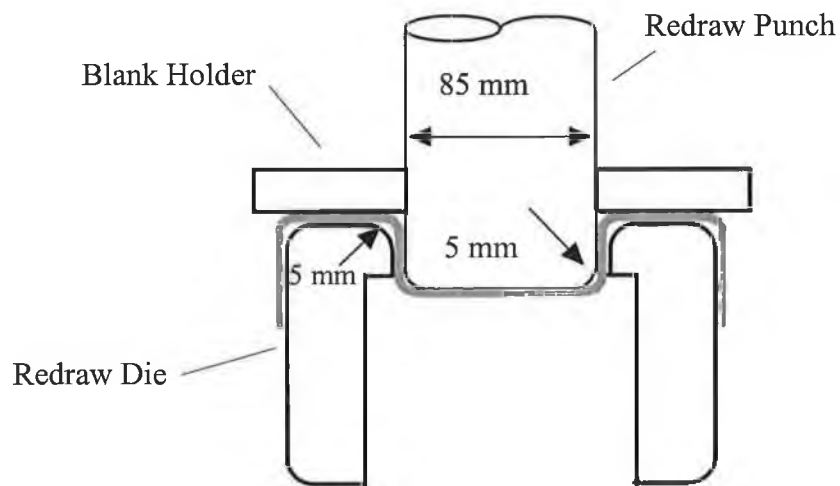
Reverse Redrawing Tool Geometry
